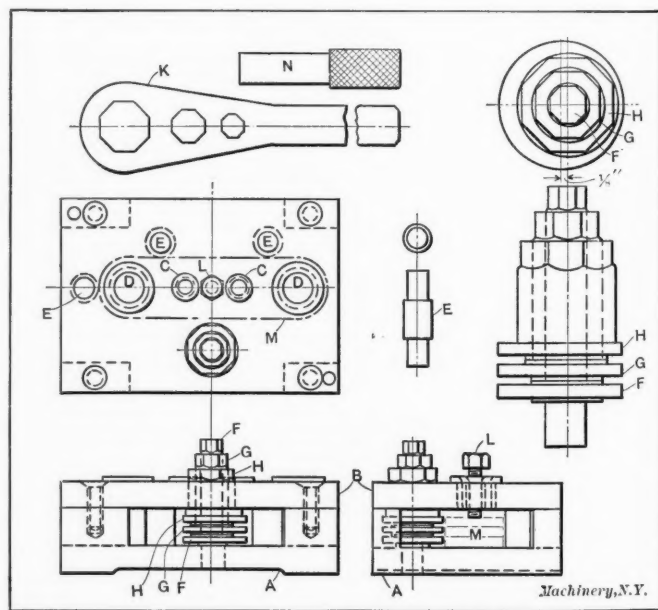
Jig equipped with Unique Type of Eccentric Clamping Device
